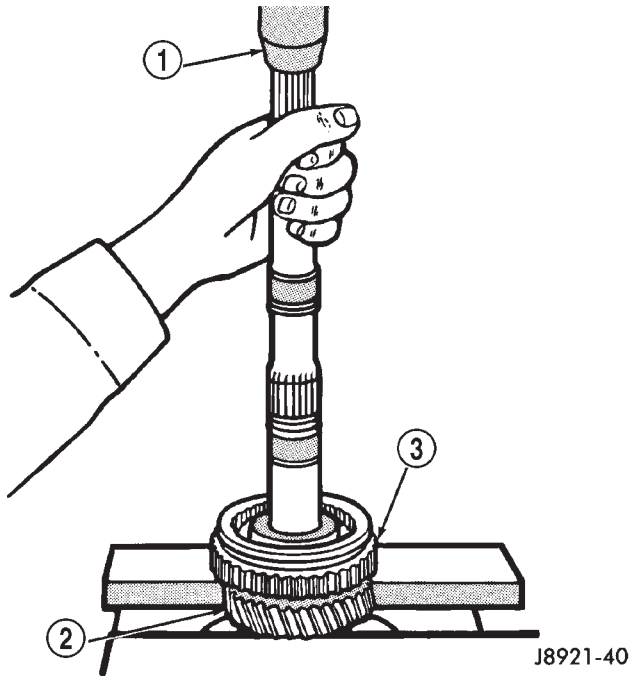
Remove Second Gear, Reverse Gear, And 1-2 Synchronizer
